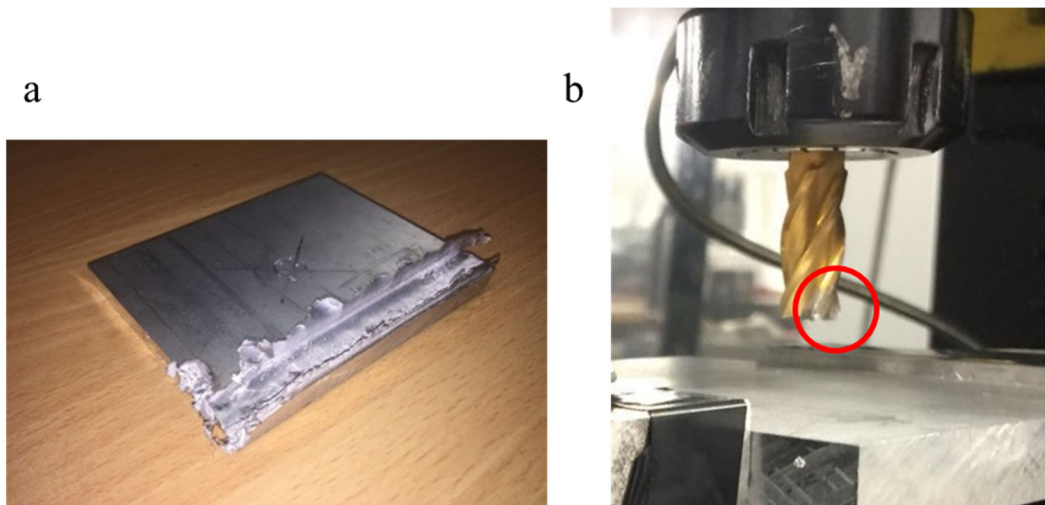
(a). Failed machining workpiece; (b). Worn cutting tool
